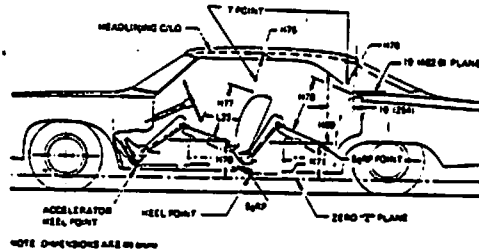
INTERIOR DIMENSIONS, HEIGHT
